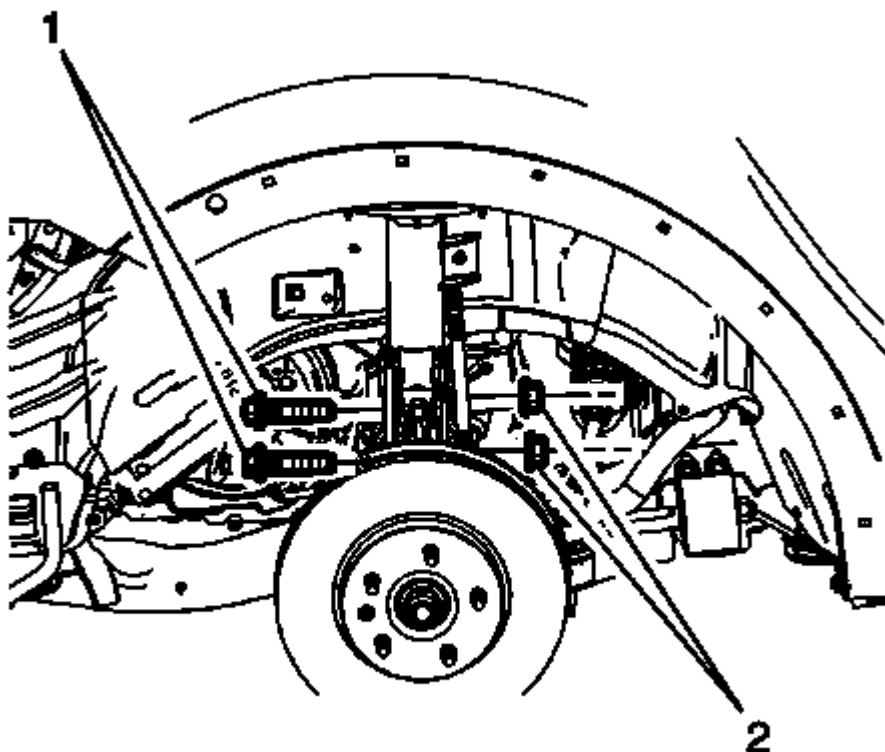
Steering Knuckle To Strut Bolts And Nuts
